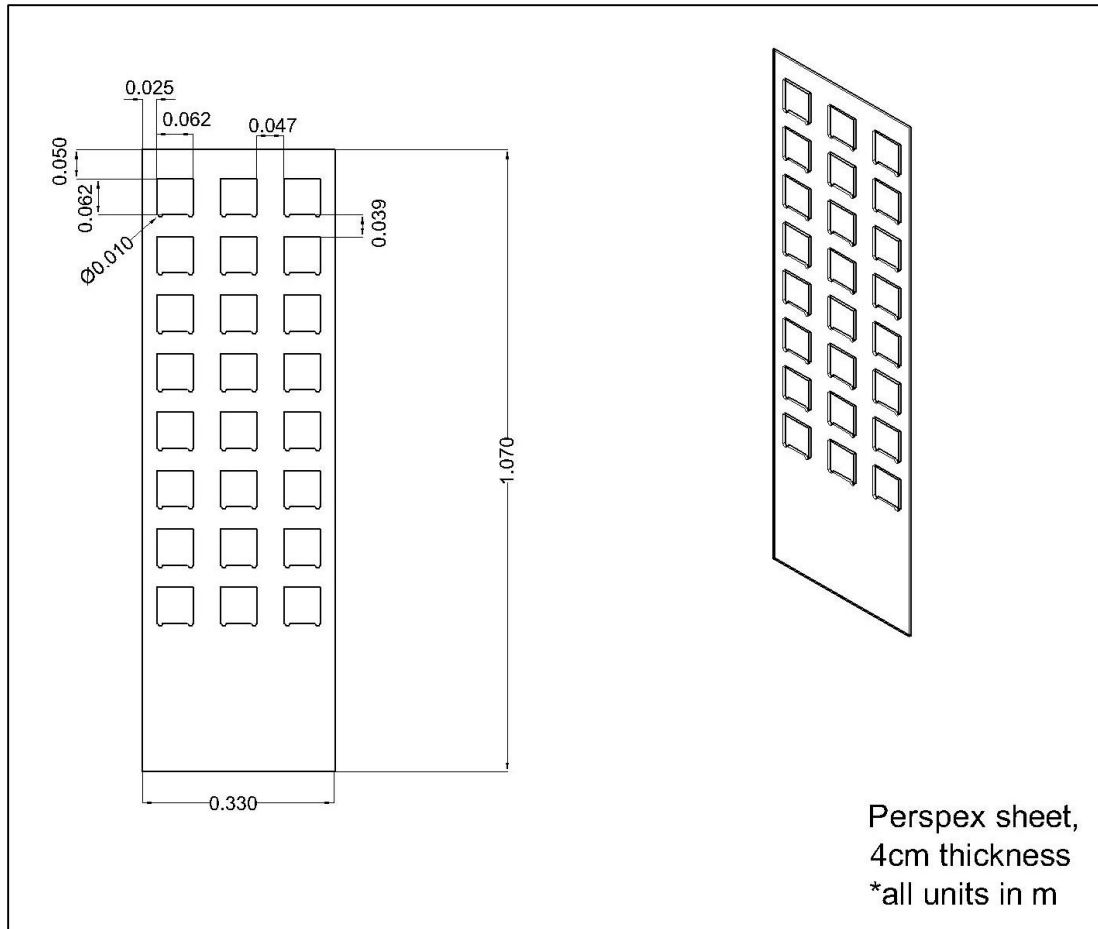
Drawings of the thermoelectric (TE) modules arrangement on a Perspex sheet.
